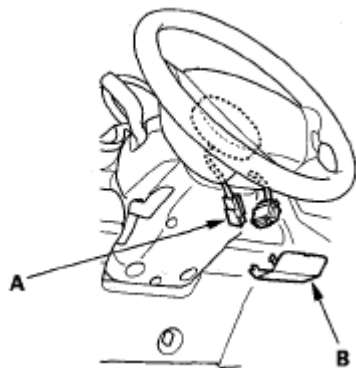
Identifying Driver's Airbag 4P Connector And Access Panel
